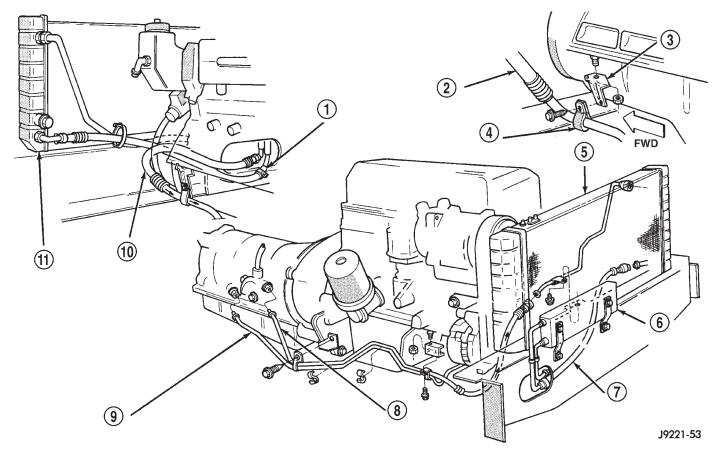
Auxiliary Cooler Mounting (Left Hand Drive)
